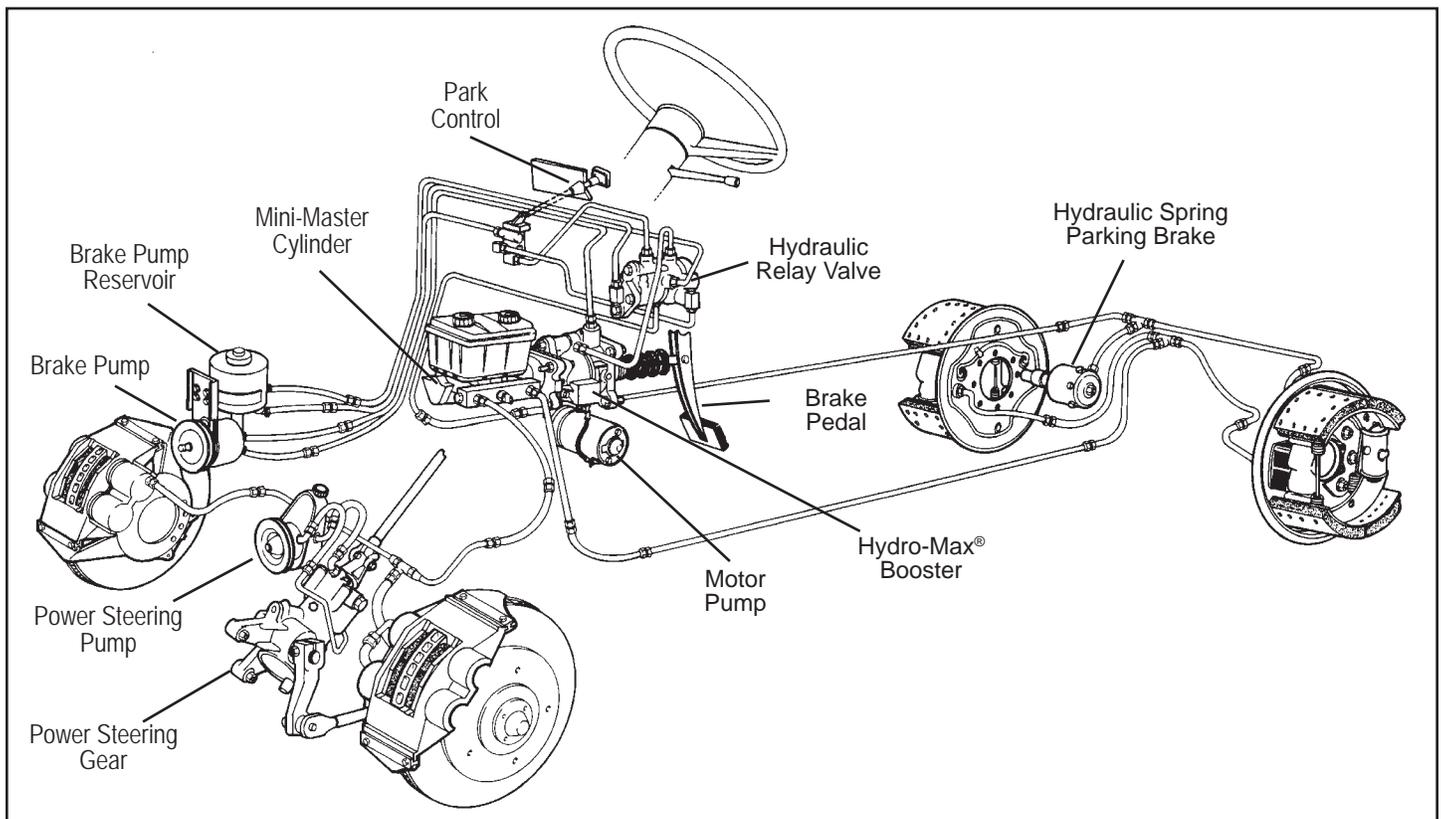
TYPICAL HYDRO-MAX® SYSTEM WITH HYDRAULIC PARKING BRAKES
